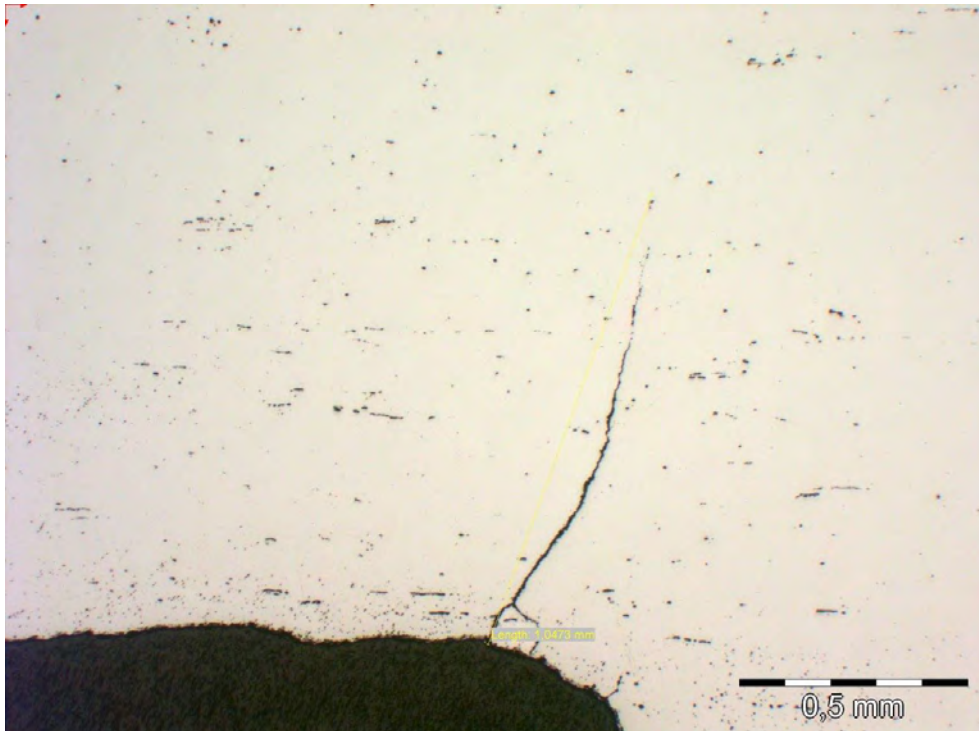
Cut six in crack at segment B, first ridge on barrel no. SFK 0120-A
